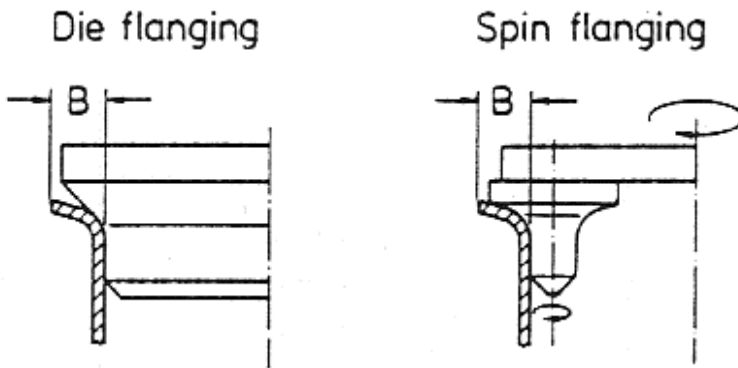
Schematic of the methods used for flanging of the can edges. The left-hand side shows a cross-section of the static die flanging process. The right-hand side displays a cross-section of the spin flanging process with the separately rotating flange tools. The capital B stands for the flange width created by the flange methods.
